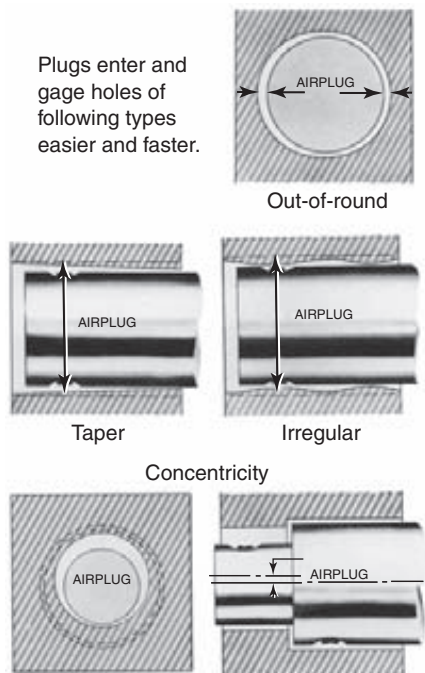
Hole geometry detectable by air gaging (Courtesy Mahr Federal Inc.).
